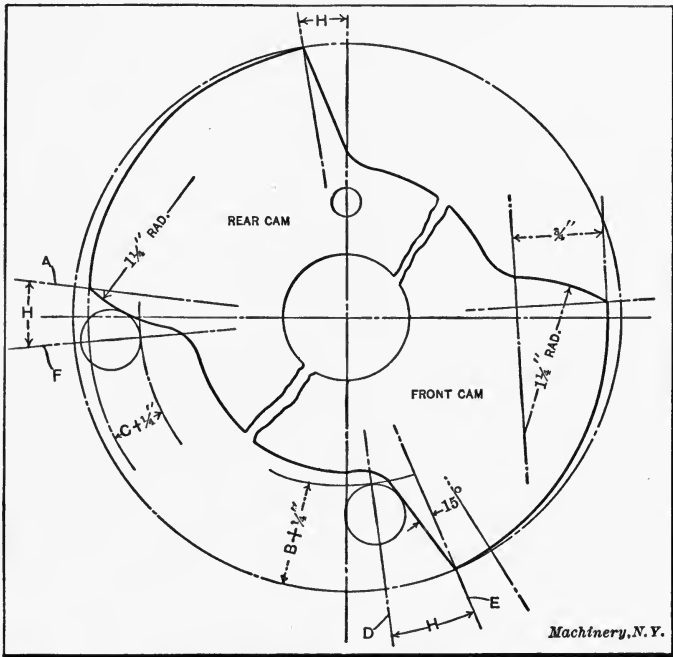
Method of Determining Clearance on Cross-slide Cams
